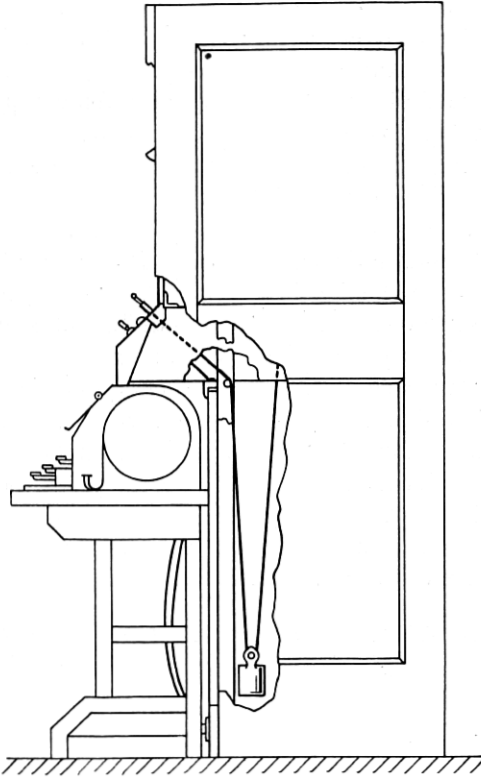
Sectional view of No. 3A Teletypewriter Switchboard.
